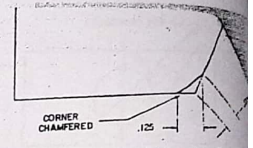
Dimensioning a chamfer on edges of more than 90°
